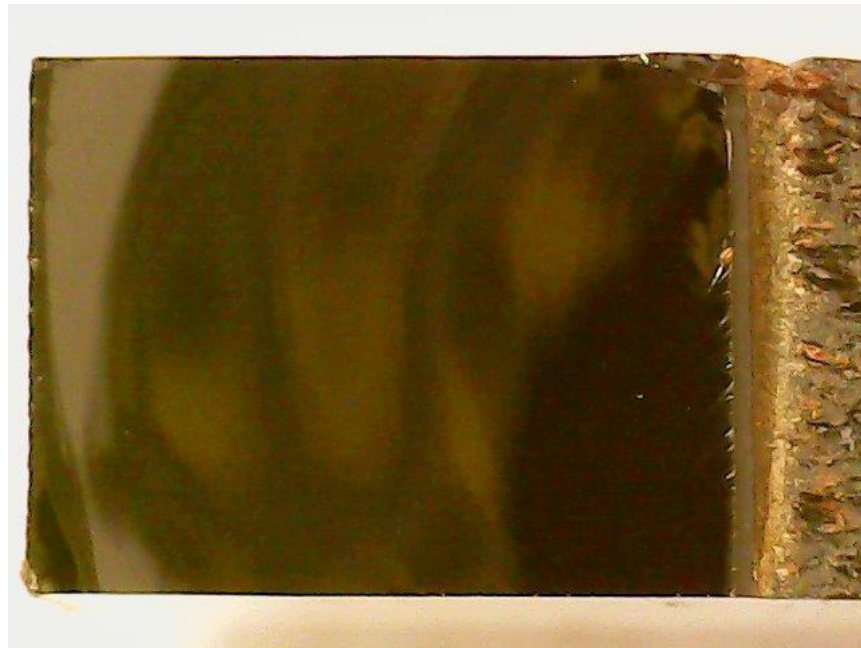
Detailed fracture surface analysis after failure. Smooth fracture surface.
